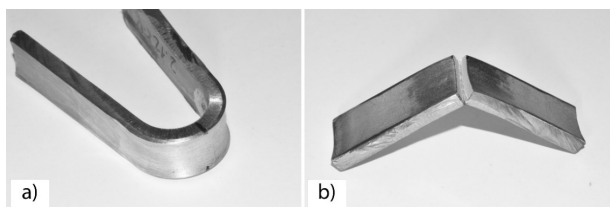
Bend testing results of specimen: a) sample 1, sector 2 (B-4), without fracture; b) sample 6, sector 3 (B7), with fracture.
